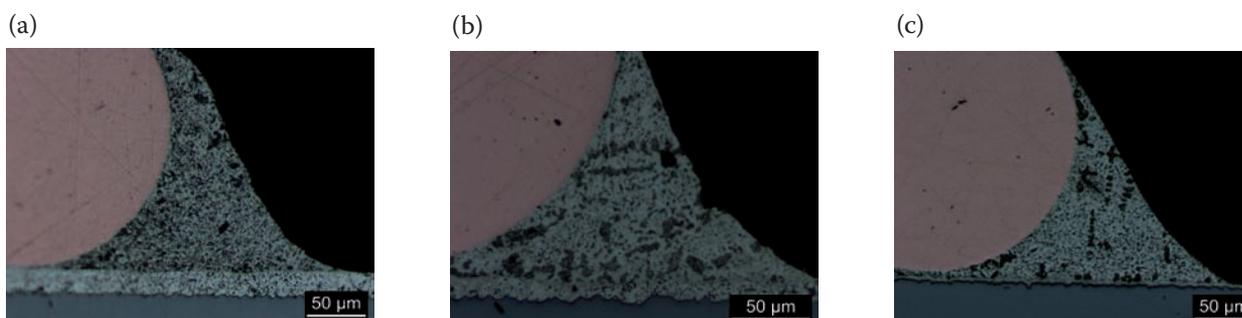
Cross sections of soldered Cu wire in cell metallization pads, and their main fracture mode after the pull test: (a) screen printing, 250µm Cu wire; (b) screen printing, 300µm Cu wire; (c) Ag plating, 250µm Cu wire.
